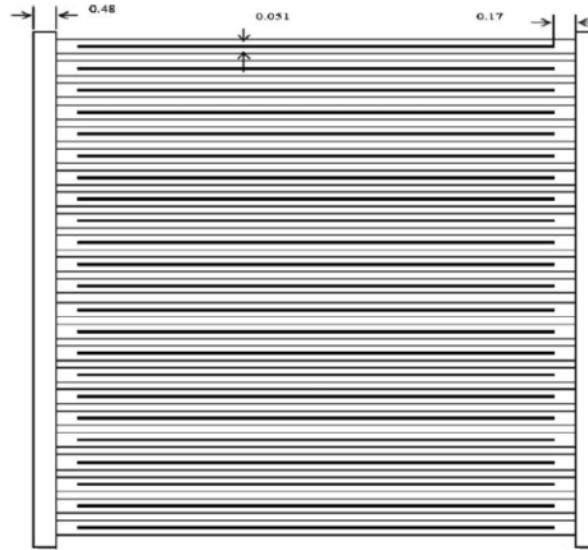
Cross sectional view of MTR fuel assembly (Bousbia-salah et al., 2006).
